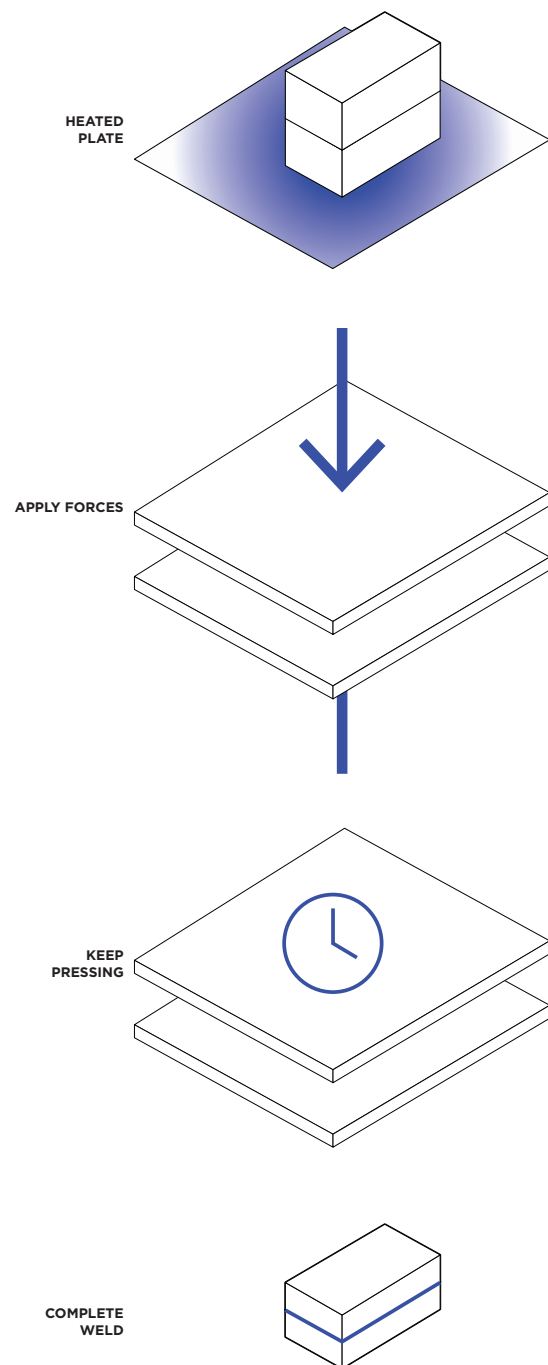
Hot-pressure welding process with heat press.
